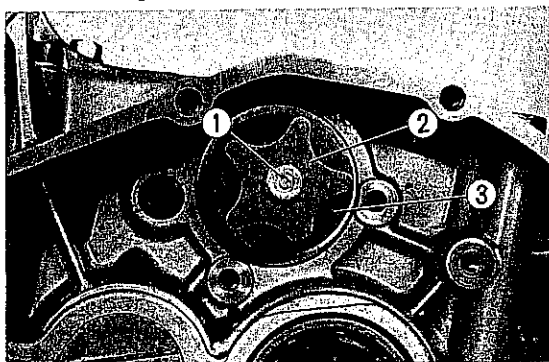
① 6mm bolt ③ Drum gearshift center
